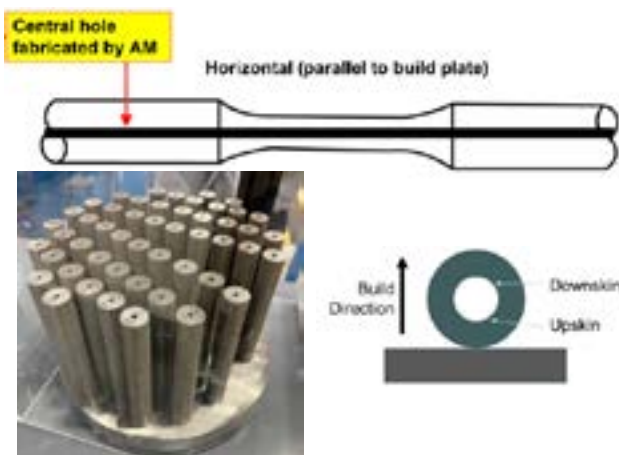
Printed tensile specimens with printed internal hole. Specimens were printed in the horizontal and vertical build directions.
